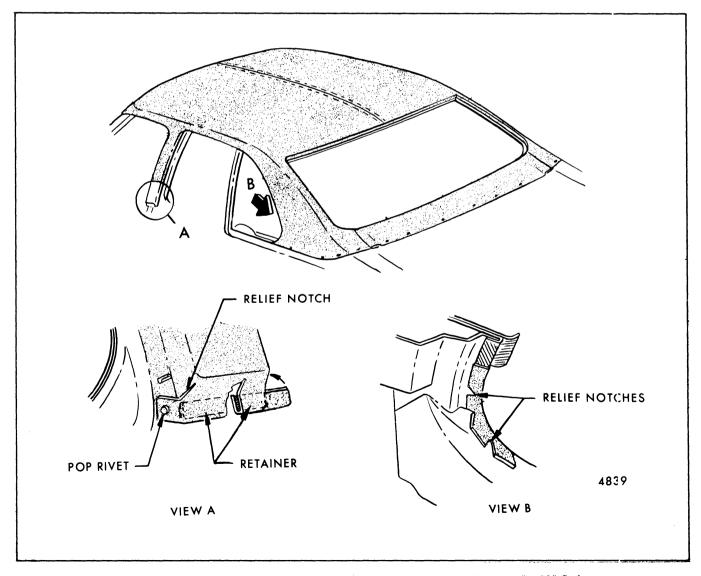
Fabric Roof Cover Installation at Center Pillar and Quarter Window - "A-29" Styles
